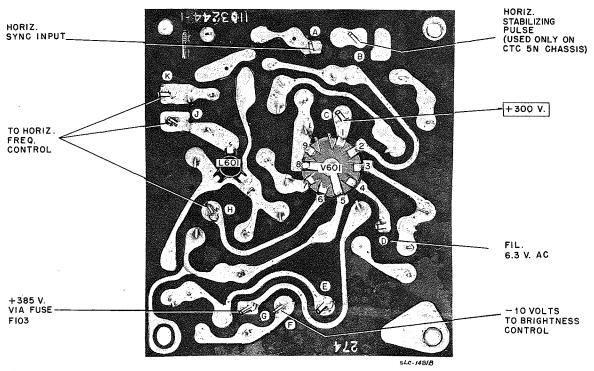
Bottom View, PW-600 Printed Circuit Board, Horizontal Oscillator and Control Circuits, CTC5, CTC5N.
